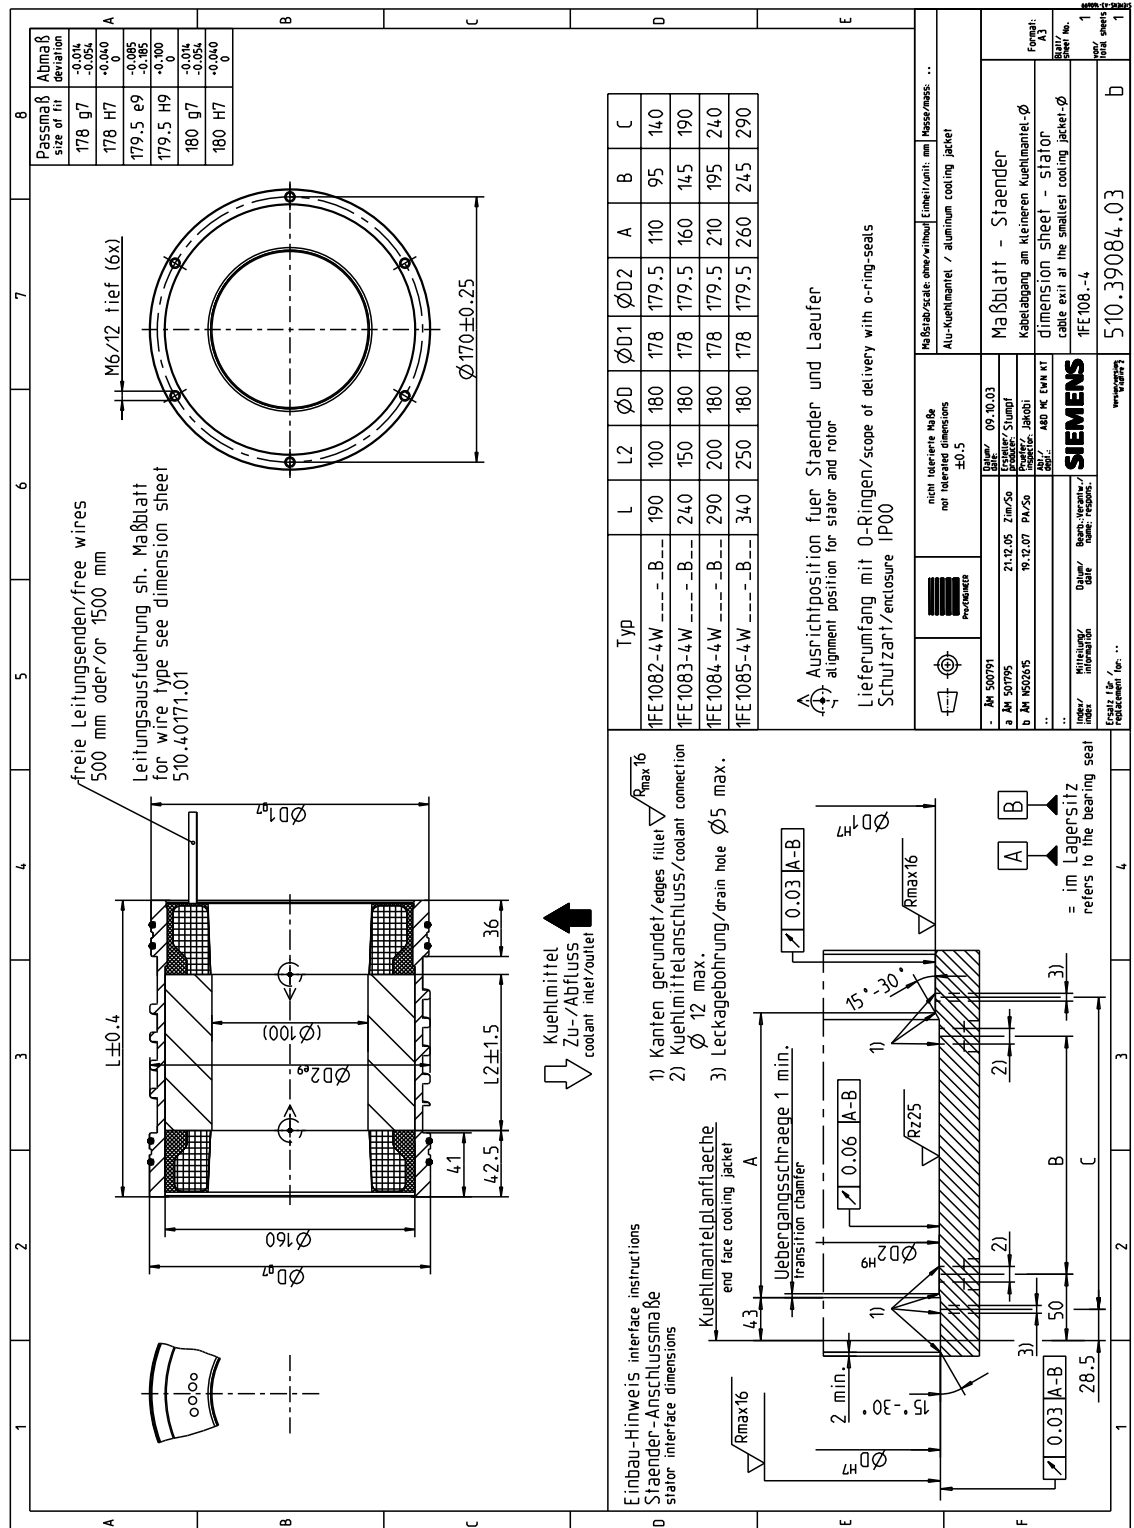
1FE108□-4, stator with cooling jacket, cable outlet at the smaller cooling jacket diameter
